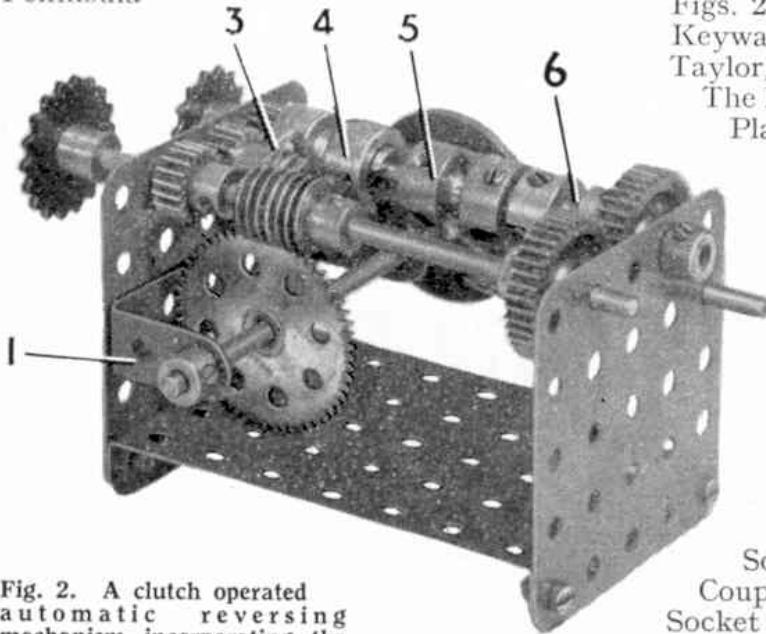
A clutch operated automatic reversing mechanism incorporating the Rod with Keyway. It was designed by H. H. Taylor, Huddersfield.
